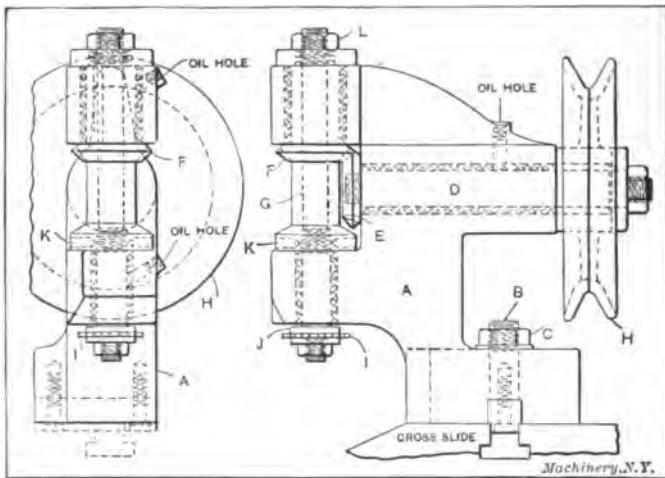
Slotting Attachment held on the Rear Cross-slide
